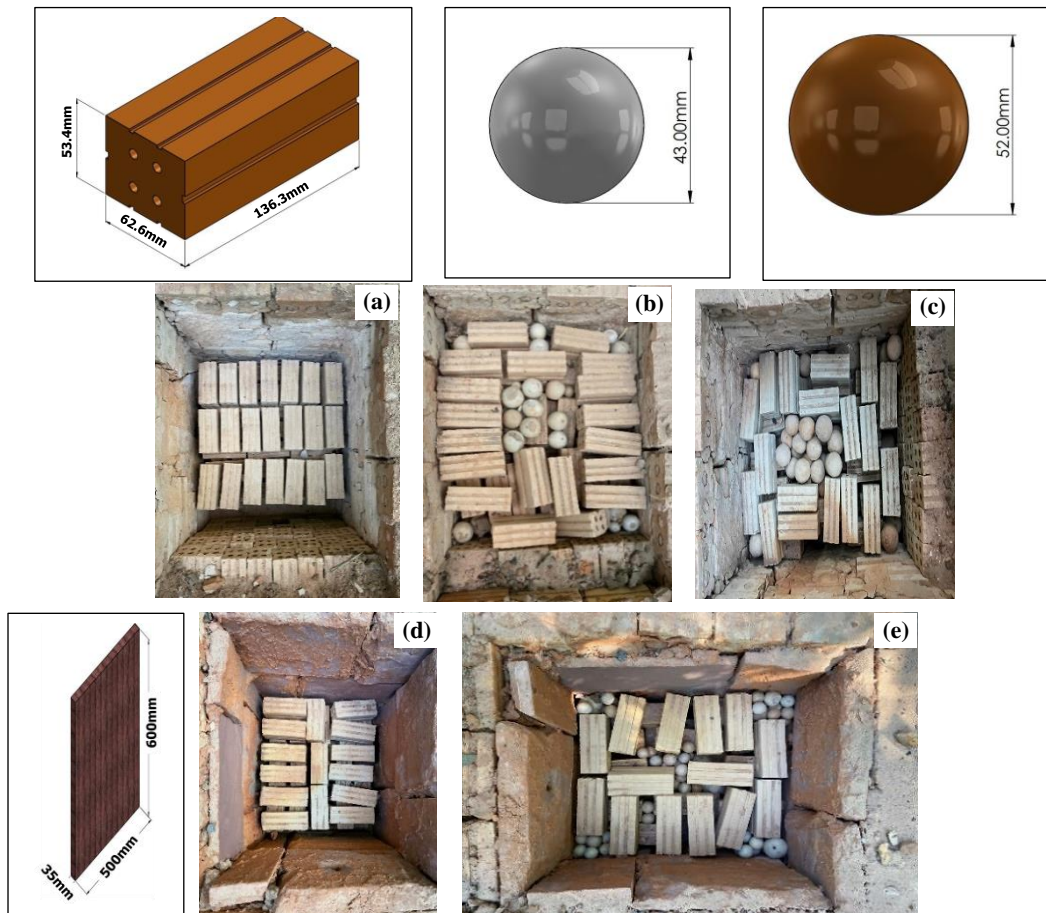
Arrangement the clay bricks: (a) without solid medium, (b) with alumina balls, (c) with clay balls, (d) with sandstone sheet, (e) with alumina ball and sandstone sheet
